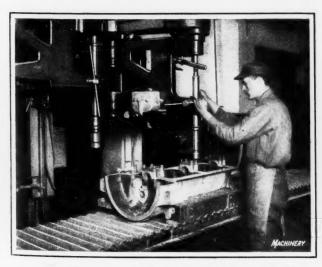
Setting Studs and driving Nuts with Hinged-arm Machines
